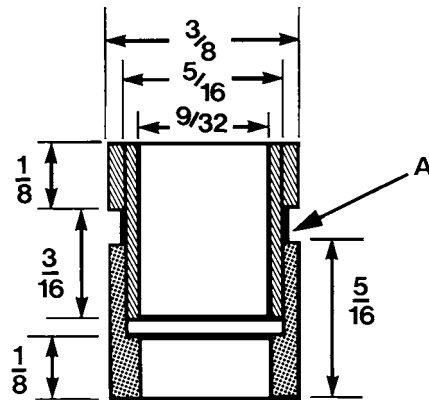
Trigger Guard Bushing Adjusting Jig
